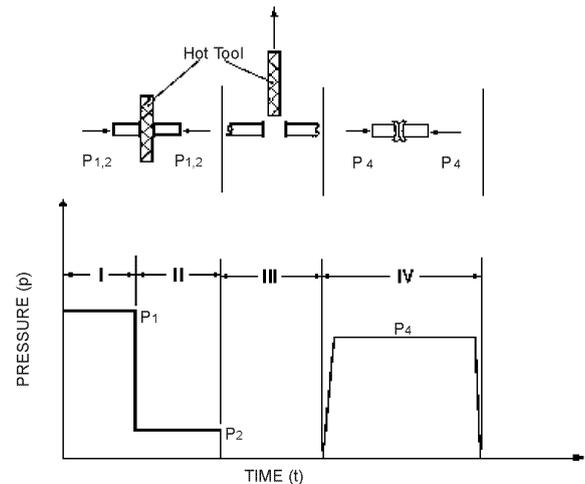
Pressure vs. time curve showing the four phases of heated tool welding. Parts to be welded are pressed against the hot tool in phase I, and heat is transferred to the parts by conduction. Melting begins when the melt temperature of the plastic is reached. In phase II, pressure is reduced in order to increase melt thickness. In phase III, the hot tool is removed, and in phase IV, the parts are brought together under pressure to cool and solidify.
